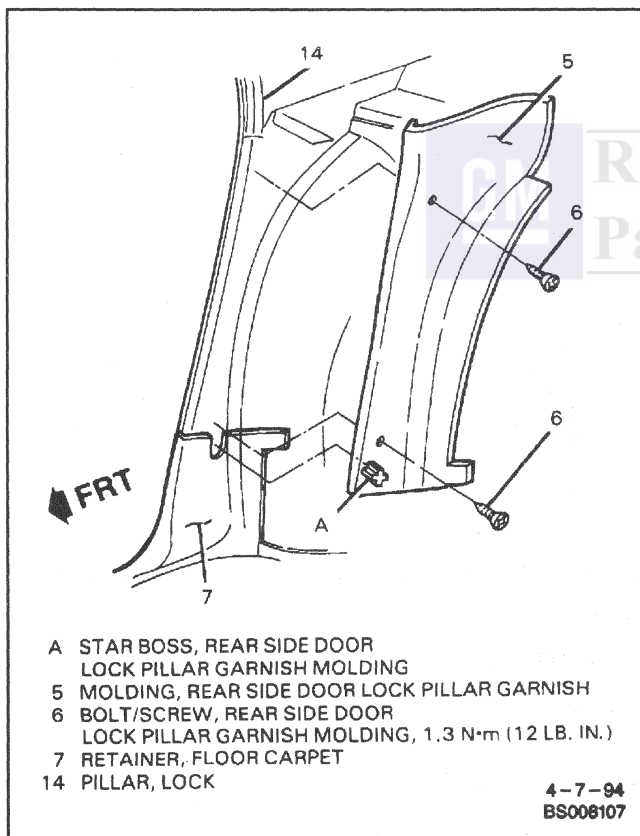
Rear Side Door Lock Pillar Garnish Molding - (Sedan)
